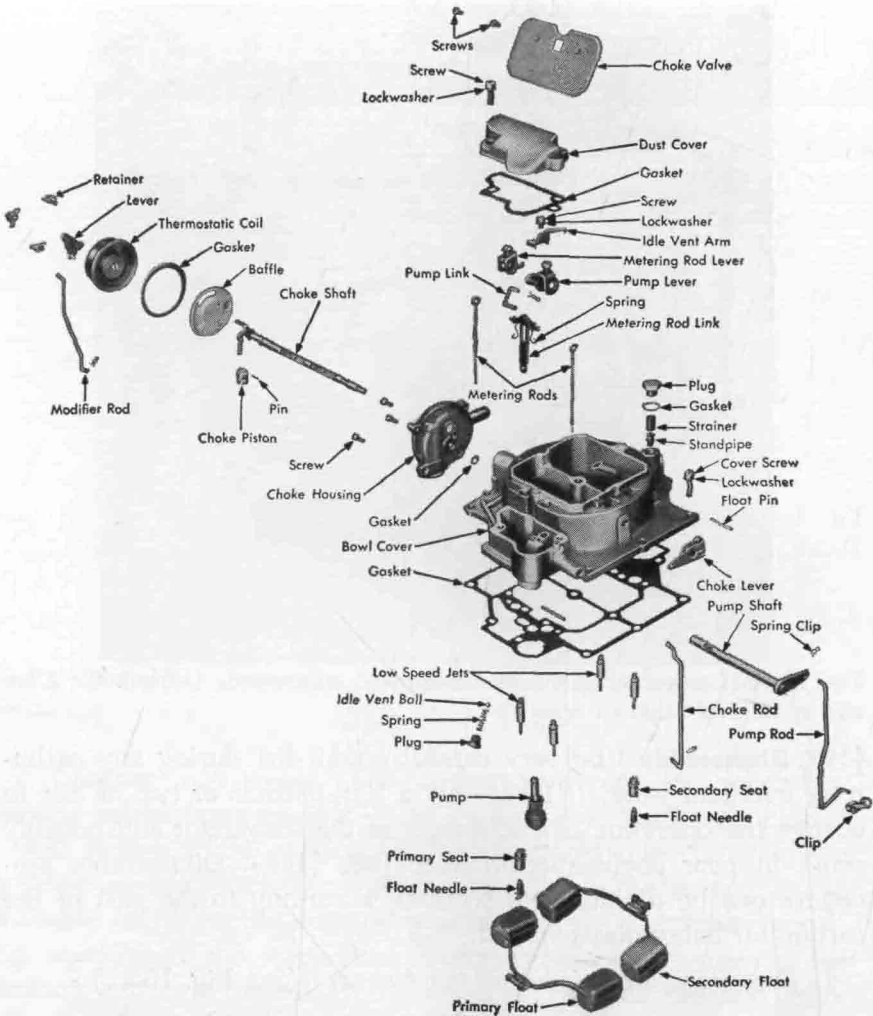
Disassembled view of bowl cover. (Cadillac Motor Car Division of General Motors Corporation)
